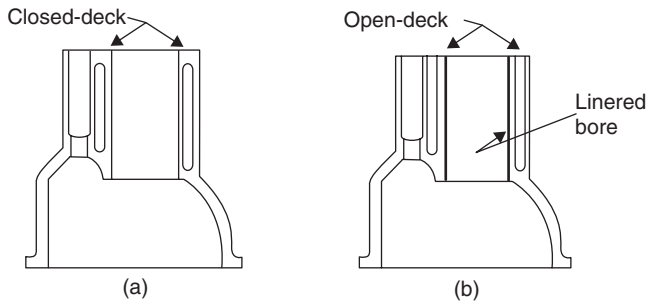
Cylinder block construction: (a) closed deck (b) open-deck
